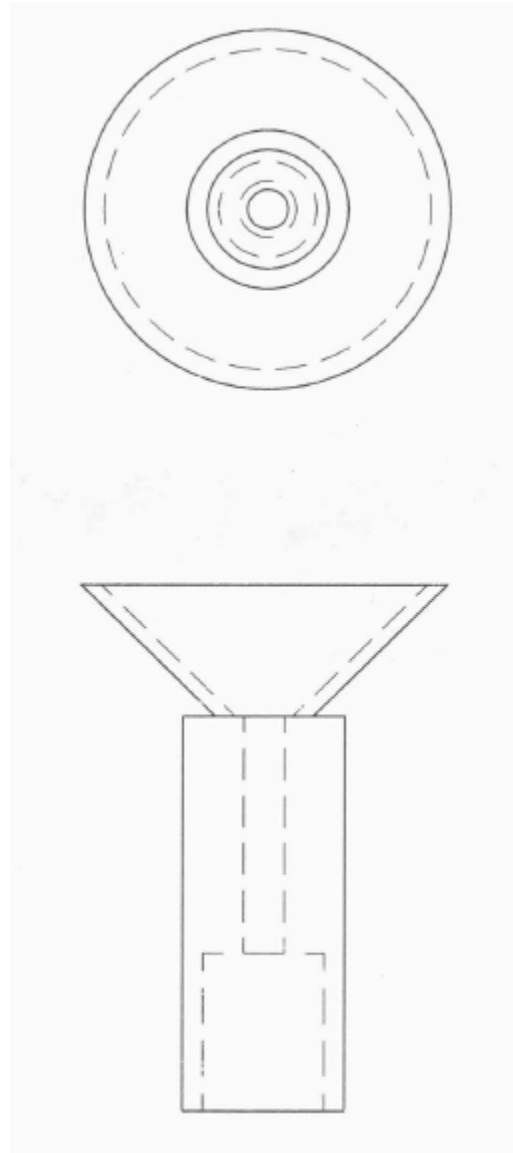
Design 5, Concept of a Multi-Stage Assembly Process
